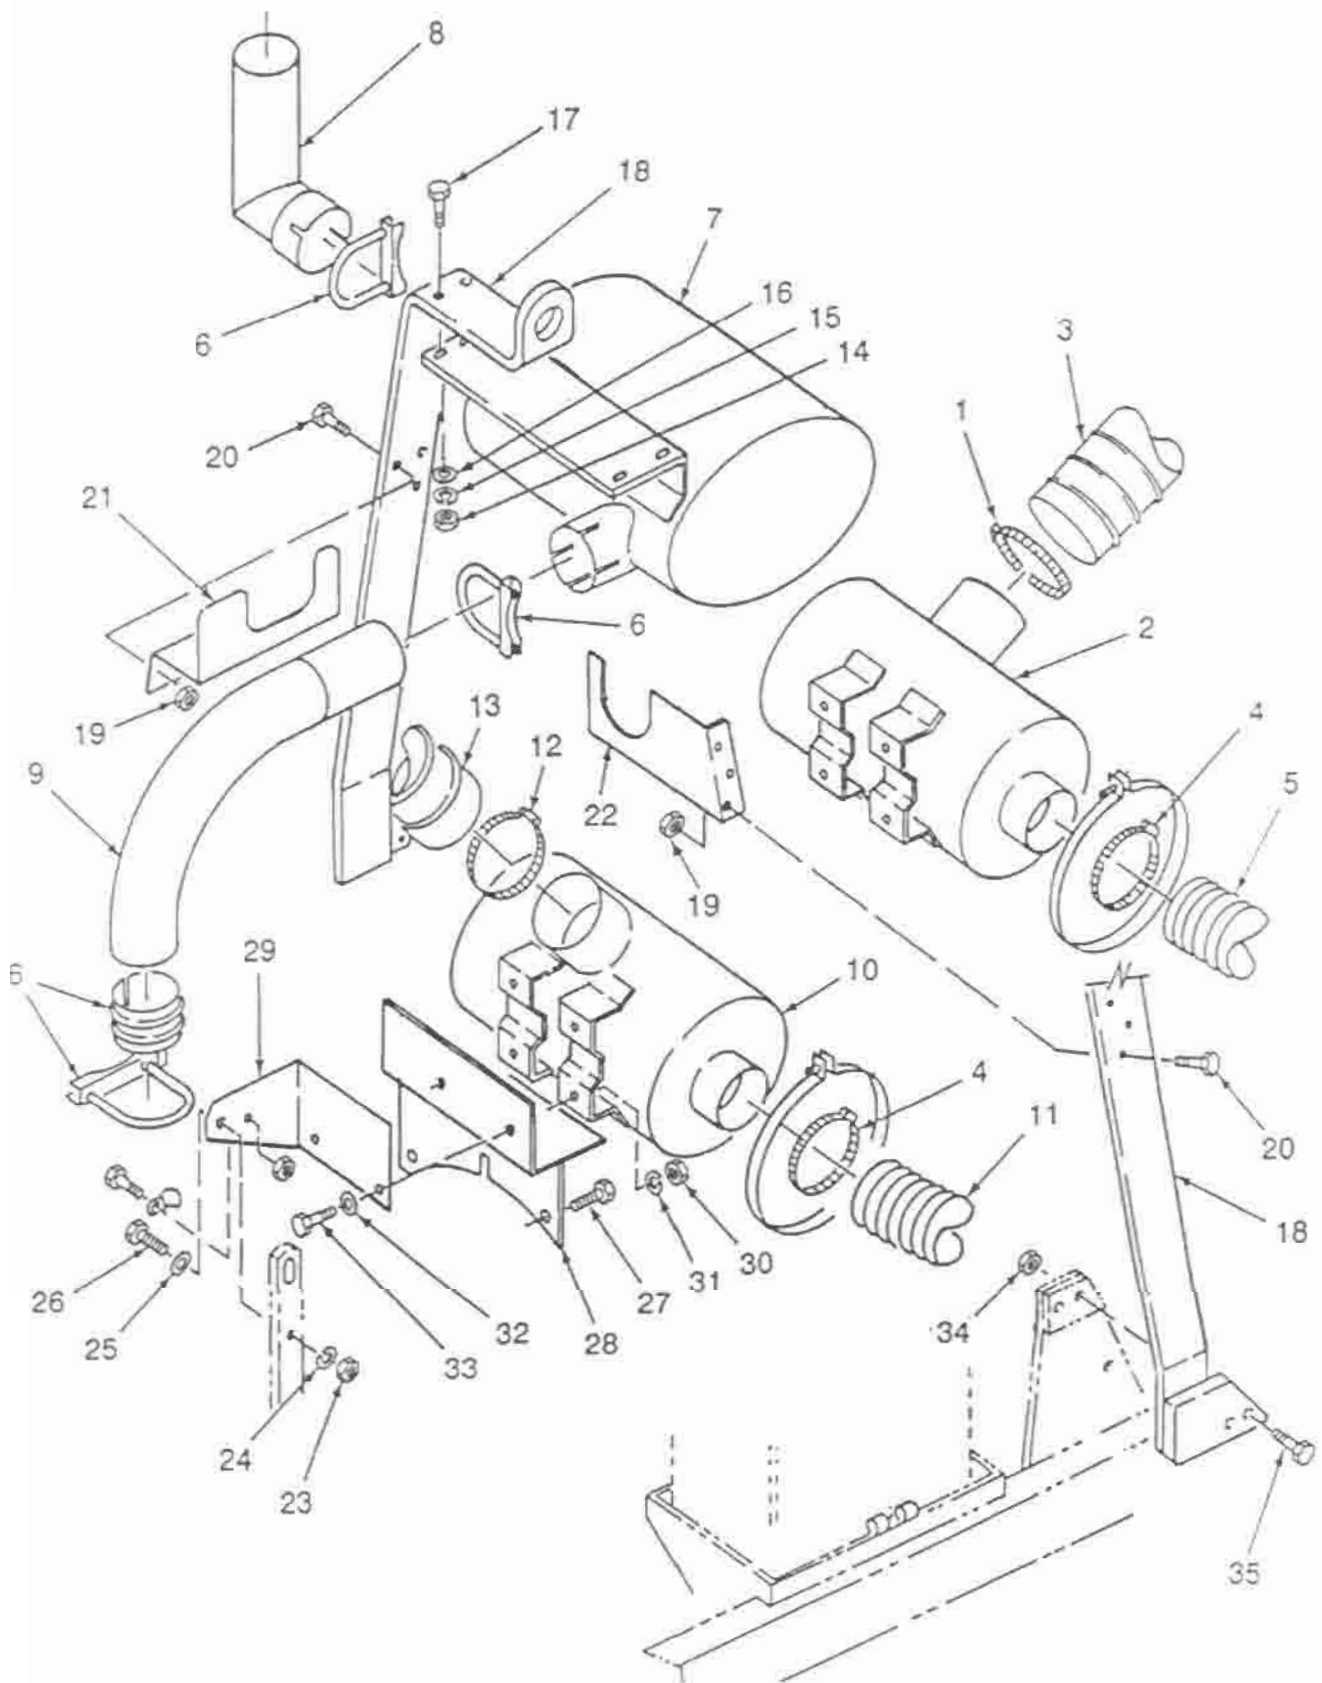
Exhaust Muffler And Air Cleaner Disassembly
